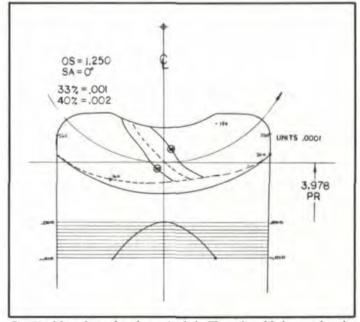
Map of one thread oversize hob. Three thread hob, two thread worm.
